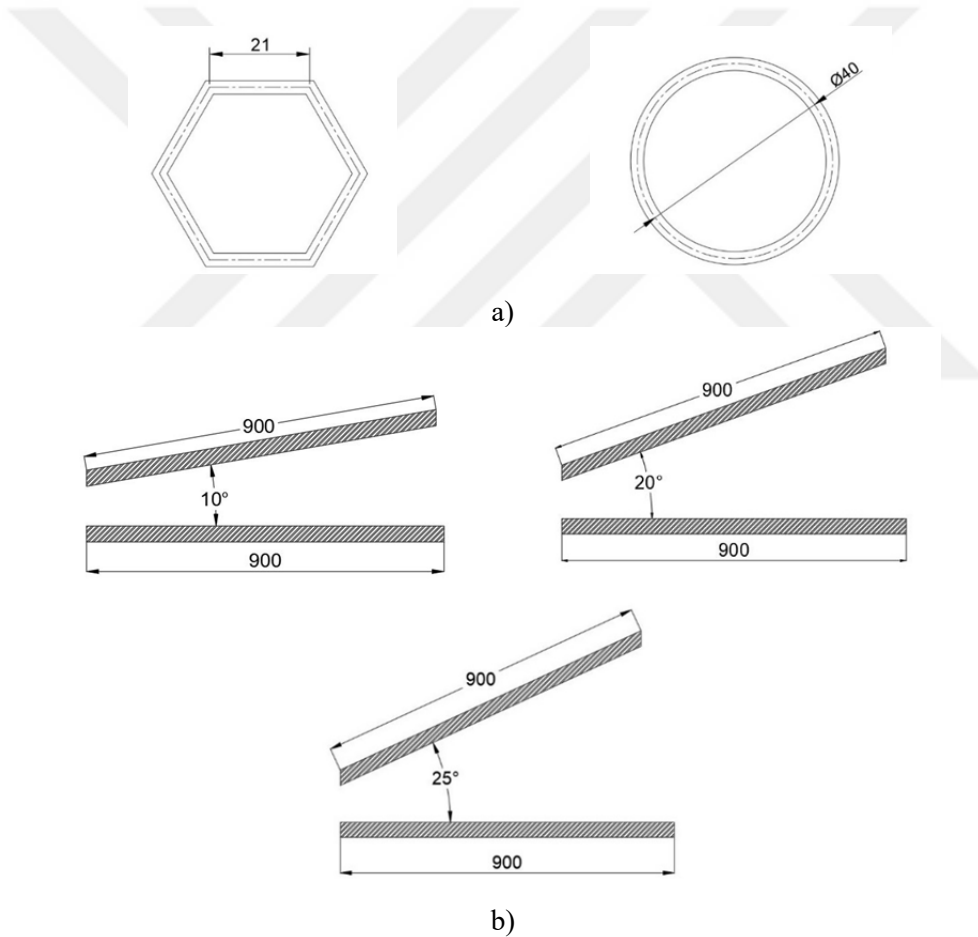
Dimensions of beams a) cross-sections of beams b) angles and length of upper and lower beams
